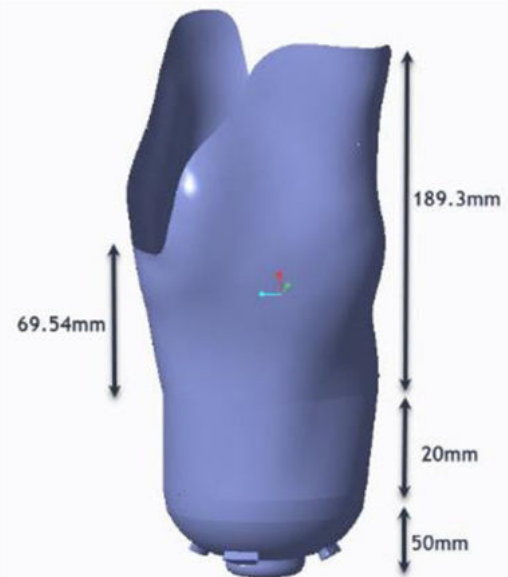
Final CAD model of below-knee socket of a sample amputee.
